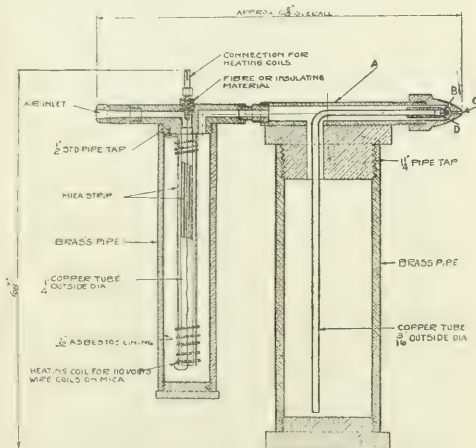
FIG.—Diagram of paraffin sprayer. A, half inch brass pipe soldered to cap, iron pipe size; B, this end of inner nozzle to have four grooves cut on outside to permit passage of air; C, No. 47 drilled hole in end of both nozzles; D, inner nozzle to be screwed on three sixteenths inch tube.
